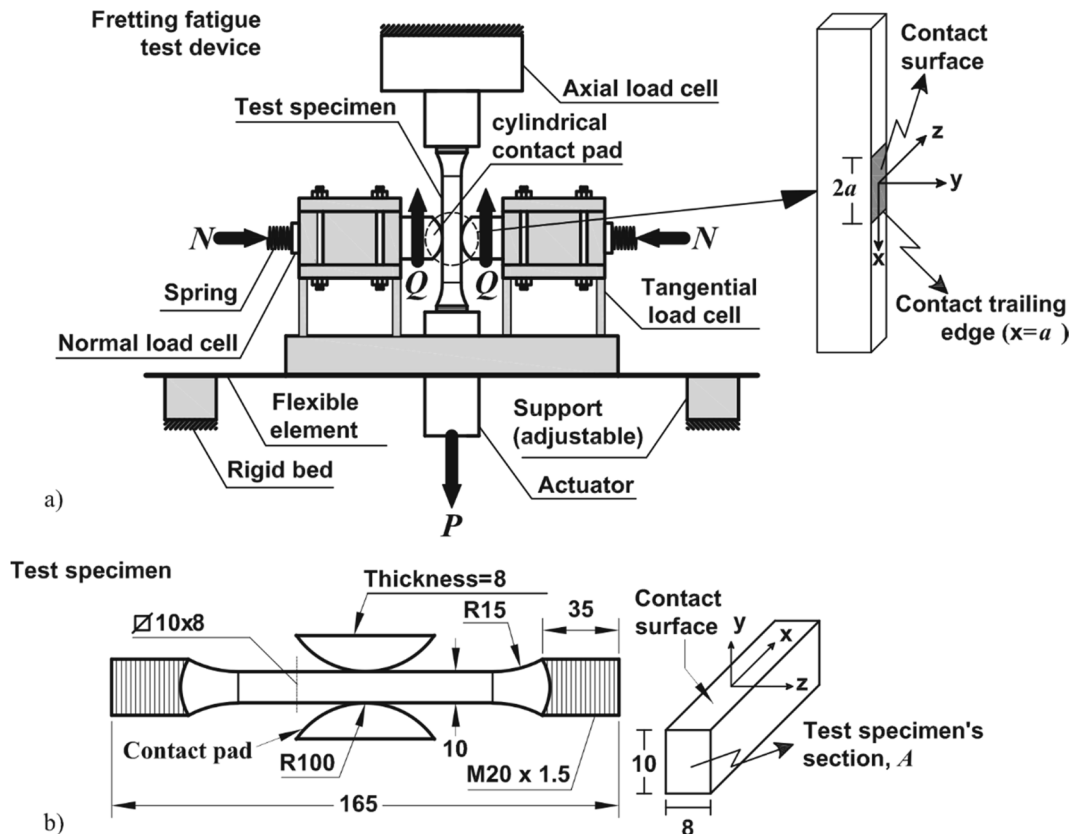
a) Scheme of the fretting fatigue test set up. b) main geometric characteristic of the fretting fatigue specimen (mm).
